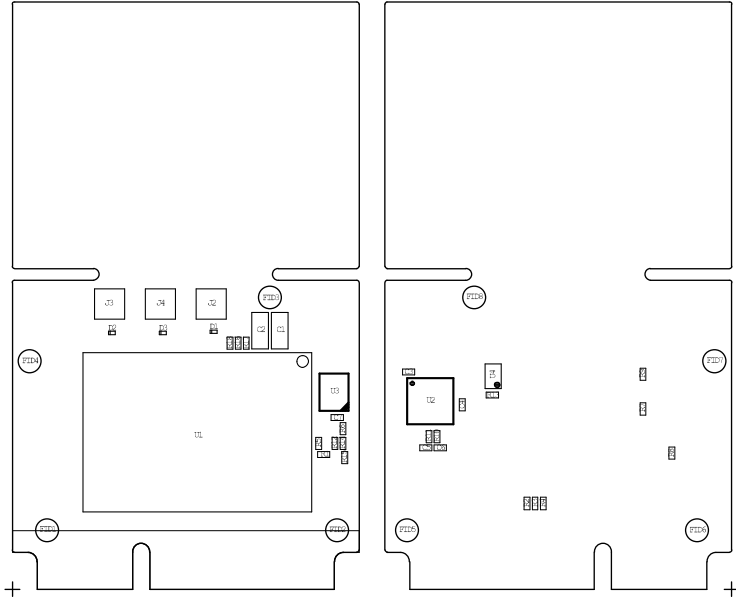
Component placement as shown in the top (left) and bottom (right) view
